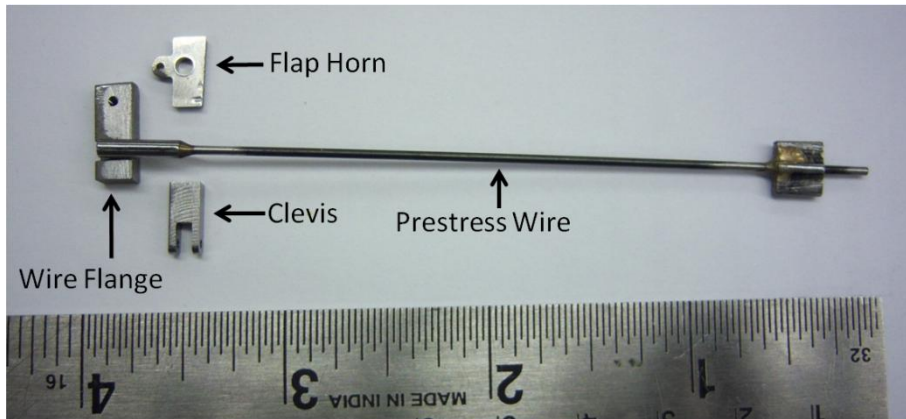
Actual Fabricated Parts for Flap Hinge Mechanism
